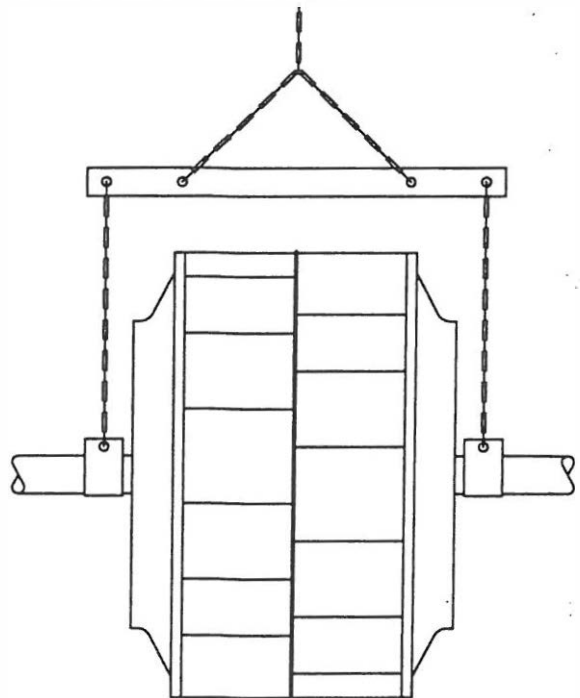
Correct use of spreader bar when lifting centrifugal rotor assembly.
